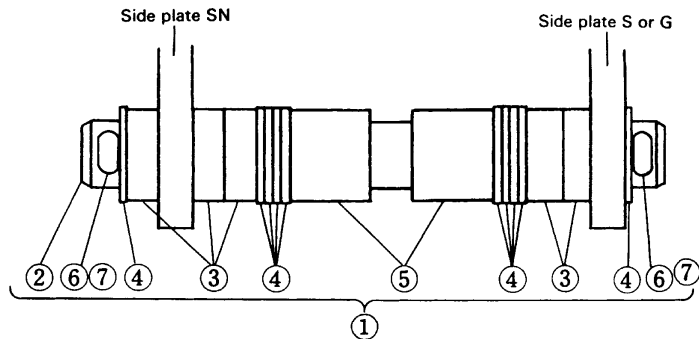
Suspension shaft W30 assembly. (0.5 t, 3 t)
